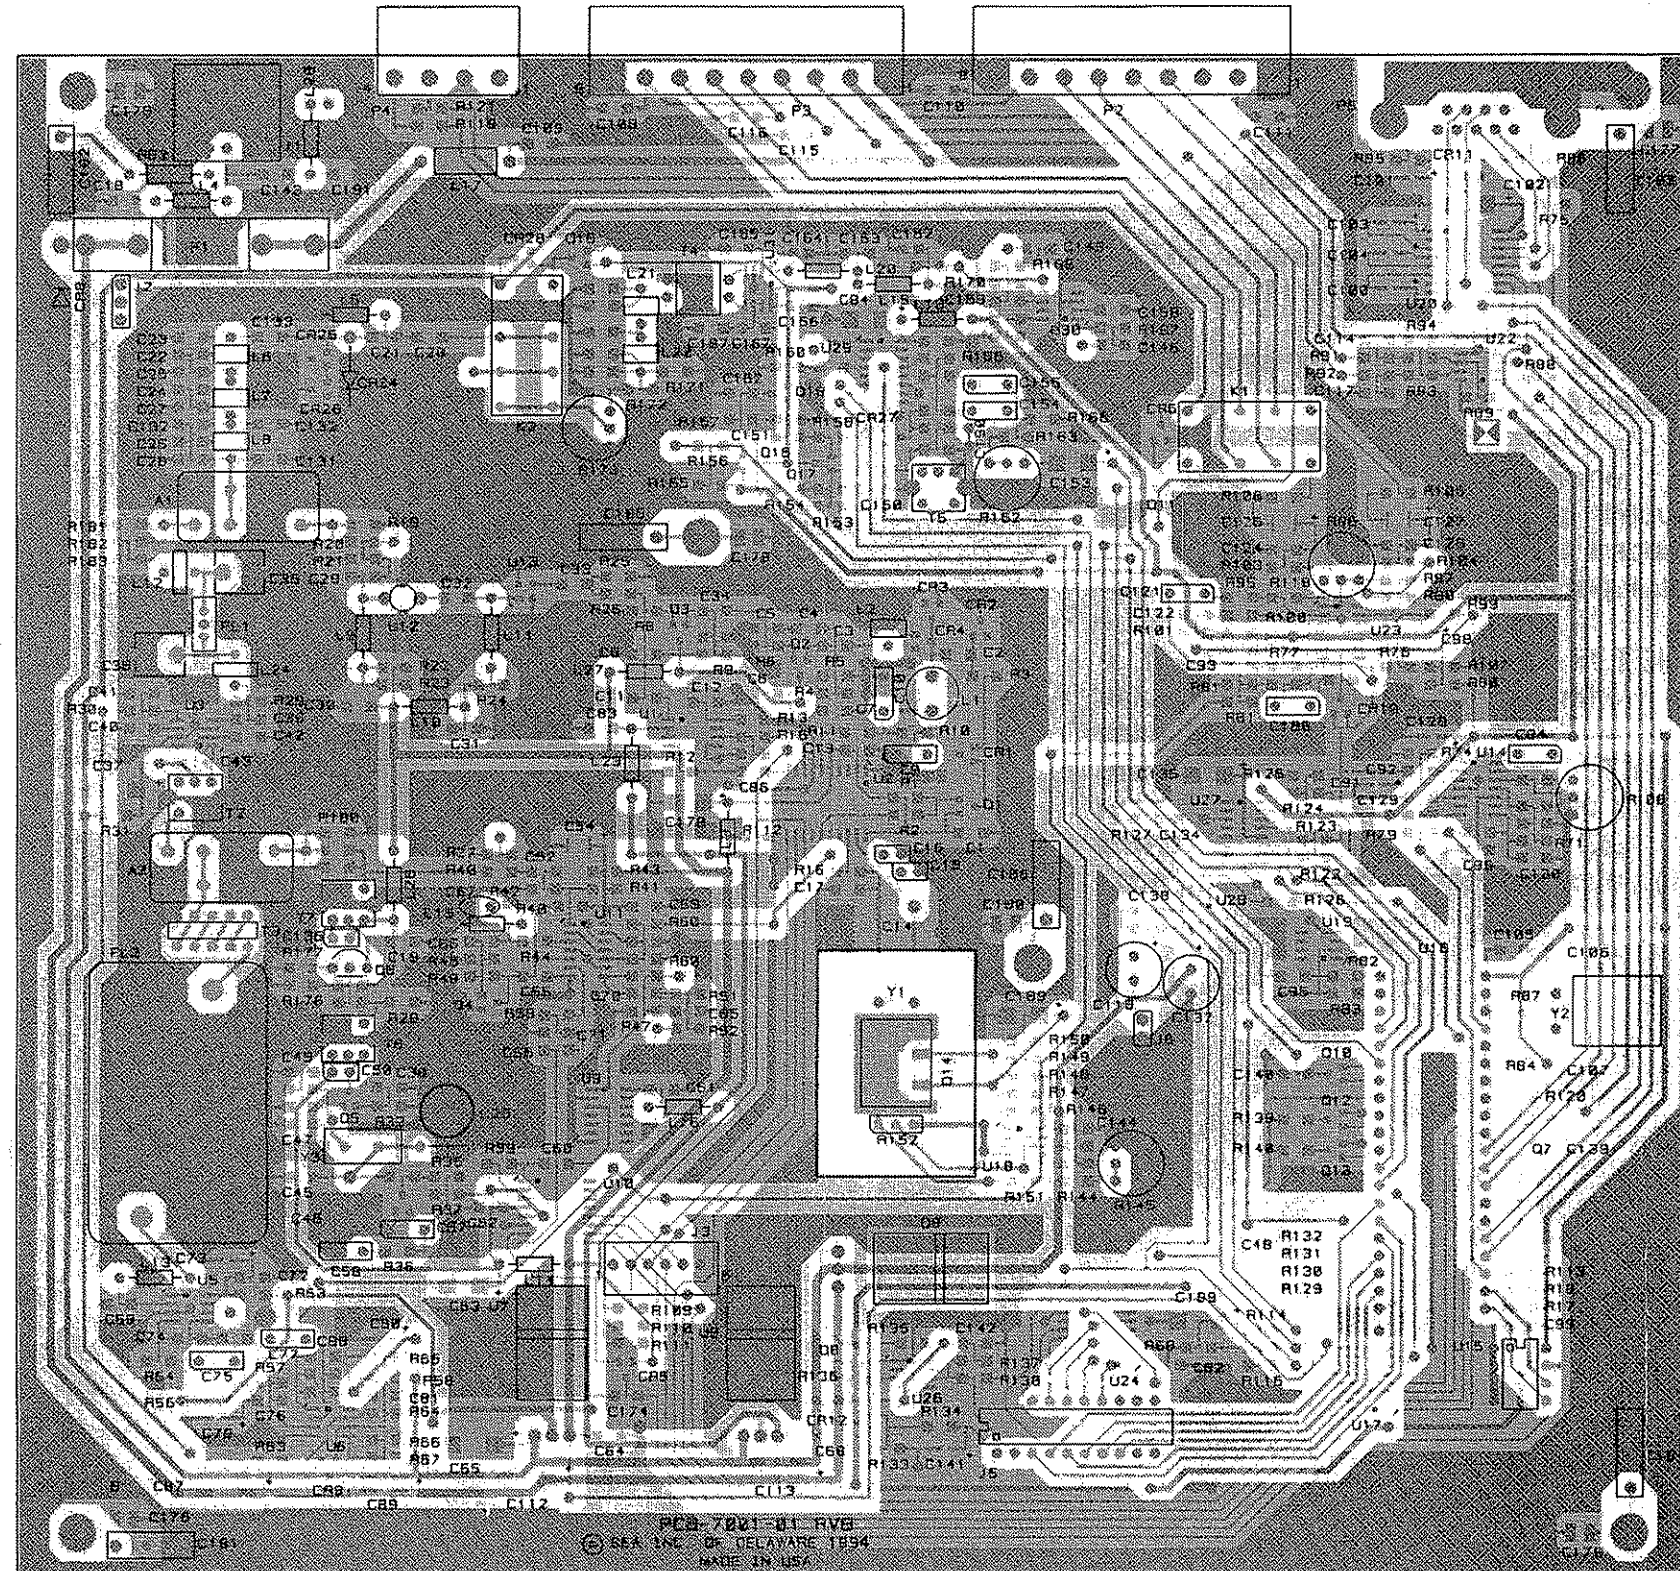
PC Assembly, R-2701 Main Board, page 3 of 6.
